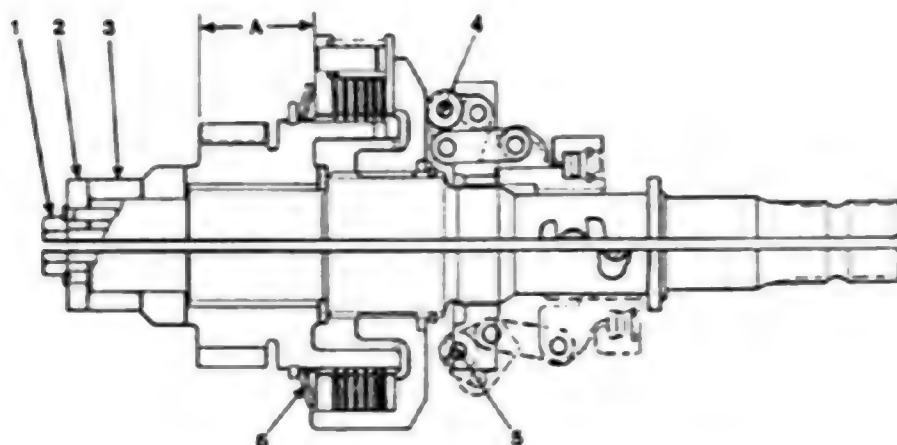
Sectional view of front drive clutch assembly in engaged (top) and disengaged (bottom) positions. Refer to text for adjustment procedure.
